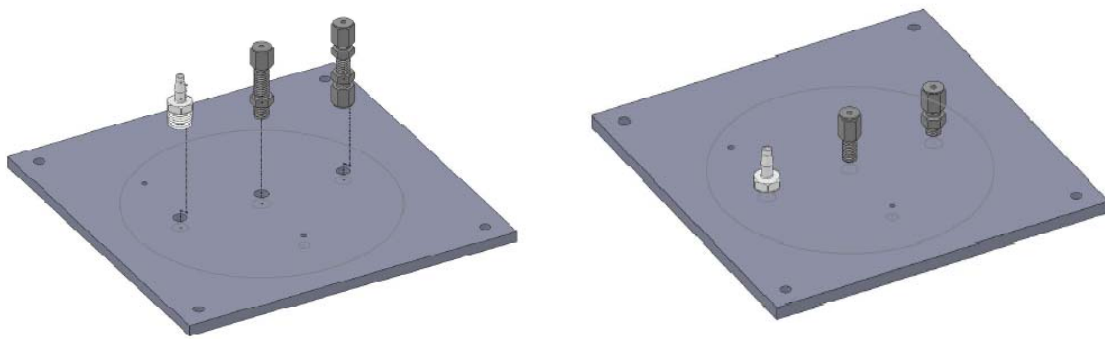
Head Plate Assembly Before (left) and after (right) installation of Barbed Fittings
